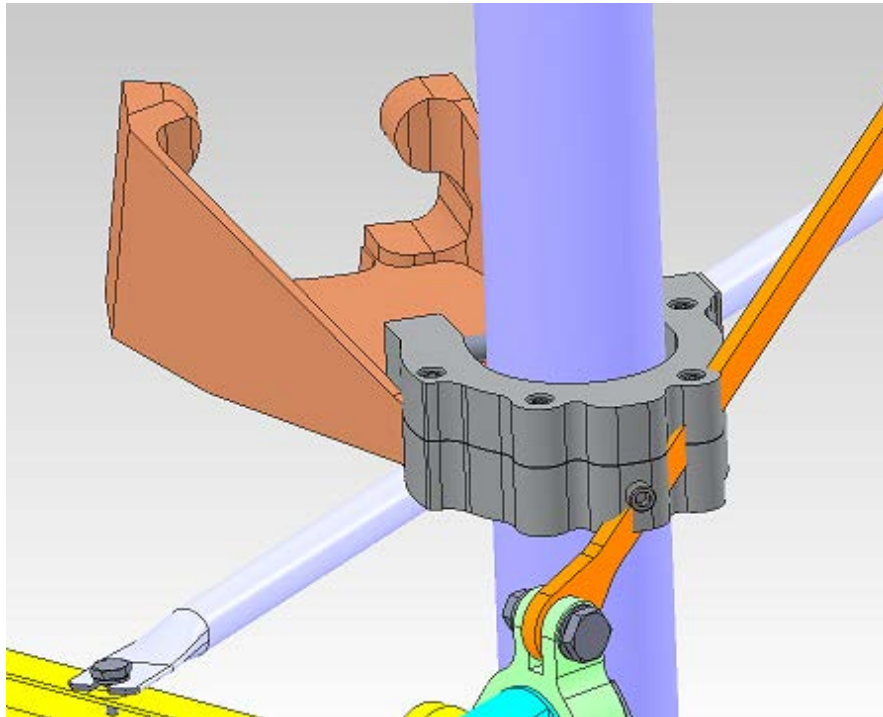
AVASS Roller Bearing Design for Top Brackets V2.0 Bottom Angle View
